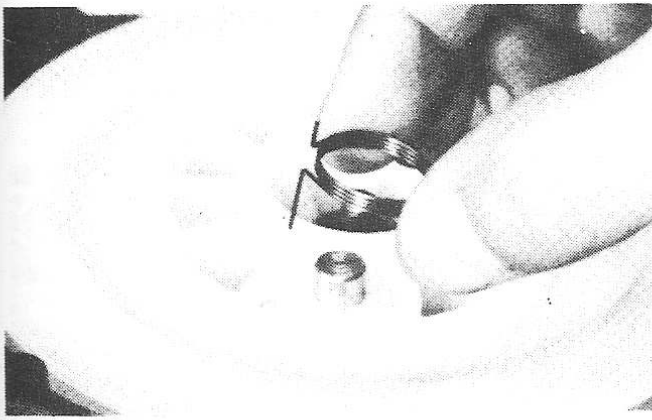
B.37 The long end of the drive pawl spring must fit into the drum hole (Sec 21)
